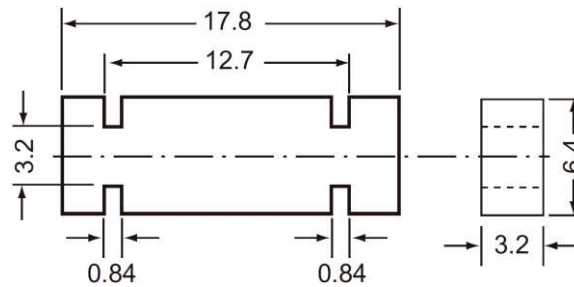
Dimensions of the double-shear specimen according to Campbell and Ferguson [61].
